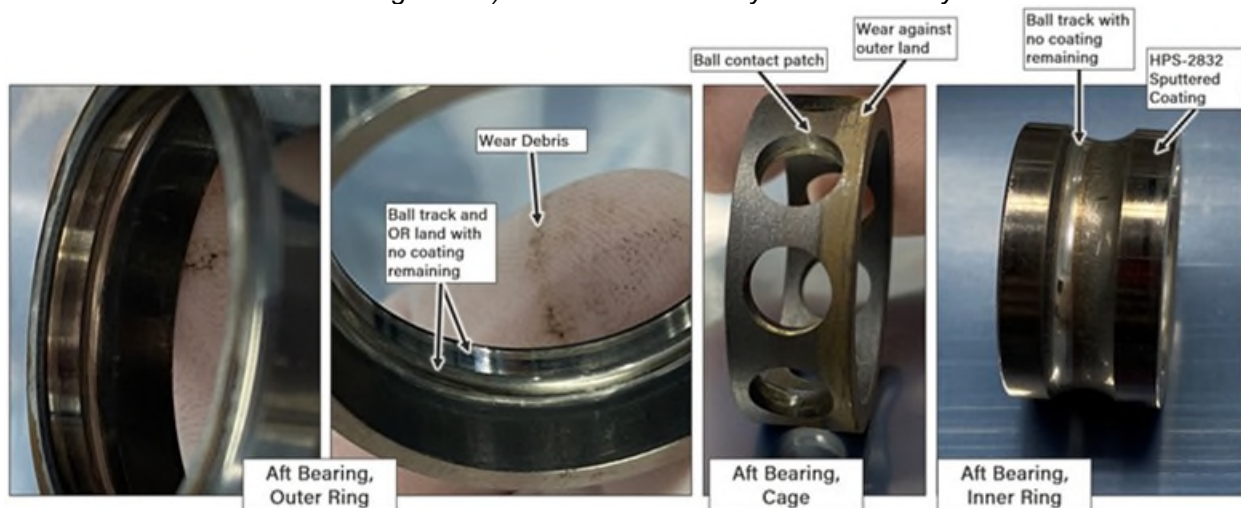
Photographs of Test Article SN2A's disassembled DFL bearings with PGM-HT cages after a successful life test
